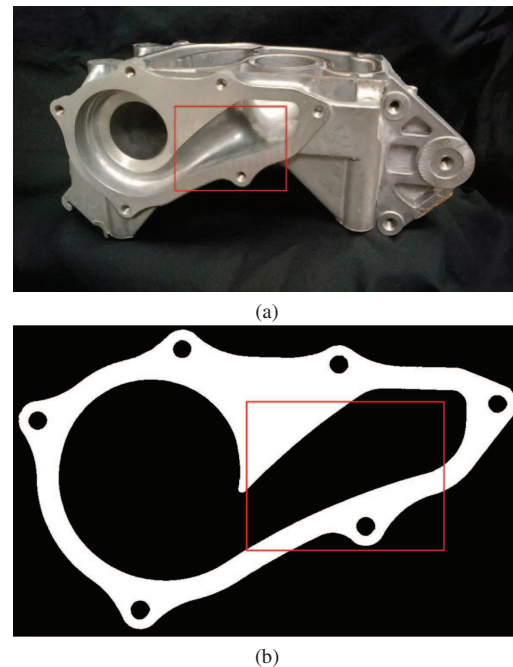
(a) The die cast aluminum automotive water pump. (b) The image mask shows the sealing surface of the water pump in white. Defects close to the inner edge of the sealing surface must be identified prior to installation. The rectangles indicate the boundary of the 70 mm by 53 mm region that will be considered in this paper.
